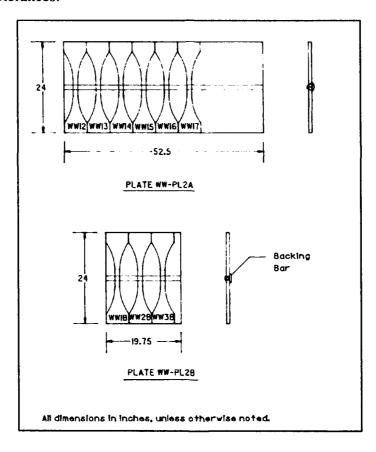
Cutting Pattern for Fatigue Test Plate WW-PL2
